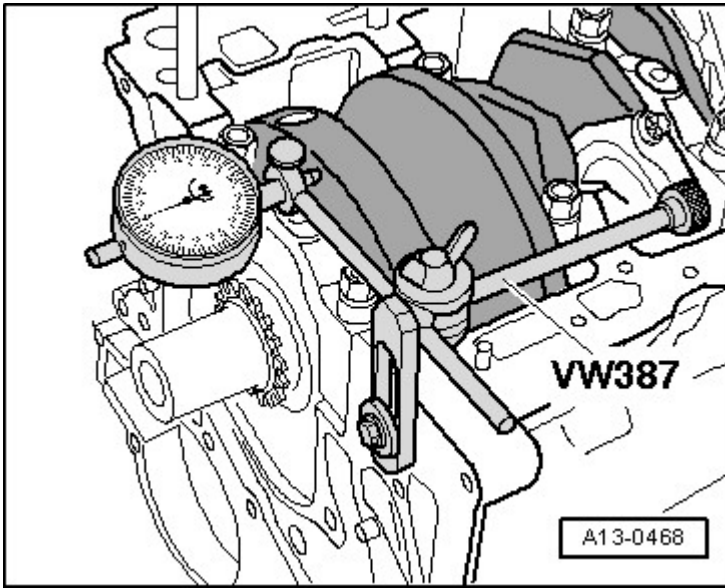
Attaching Dial Indicator Together With VW387 Dial Gauge Holder To Cylinder Block And Set Indicator Against Crankshaft Counterweight
